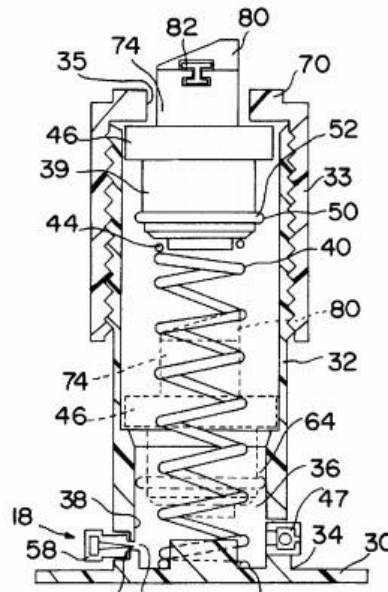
Vacuum technology holds spring in compressed position and air-release valve fills the vacuum, launching the ball.
